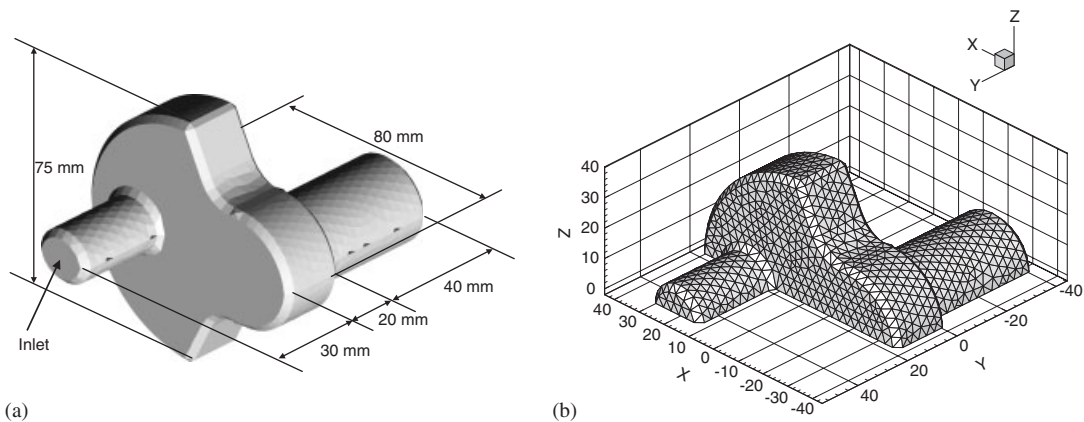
(a) Geometry of the crank shaft part; and (b) its mesh layout.
